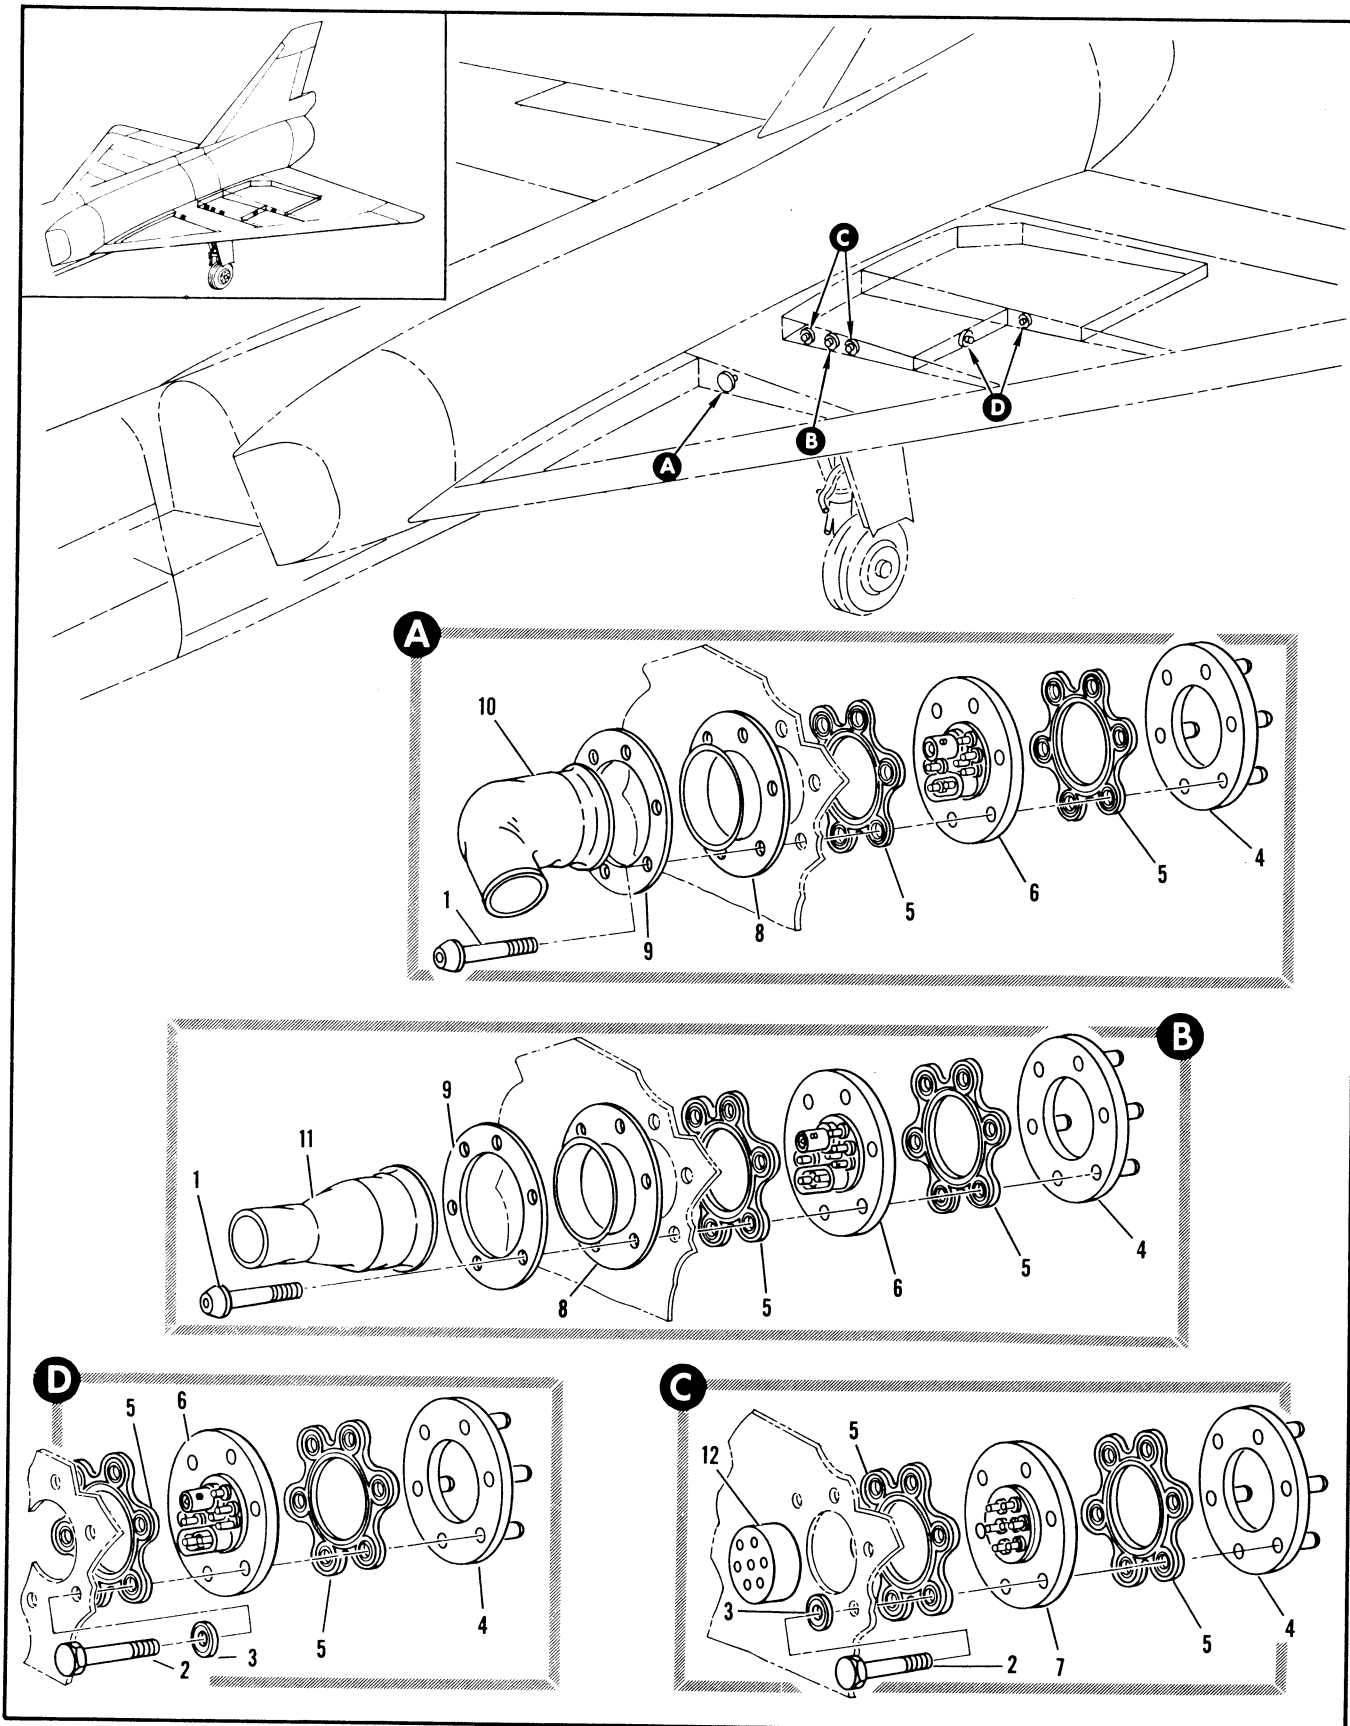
Wing Fuel Tank Electrical Receptacle Installation
